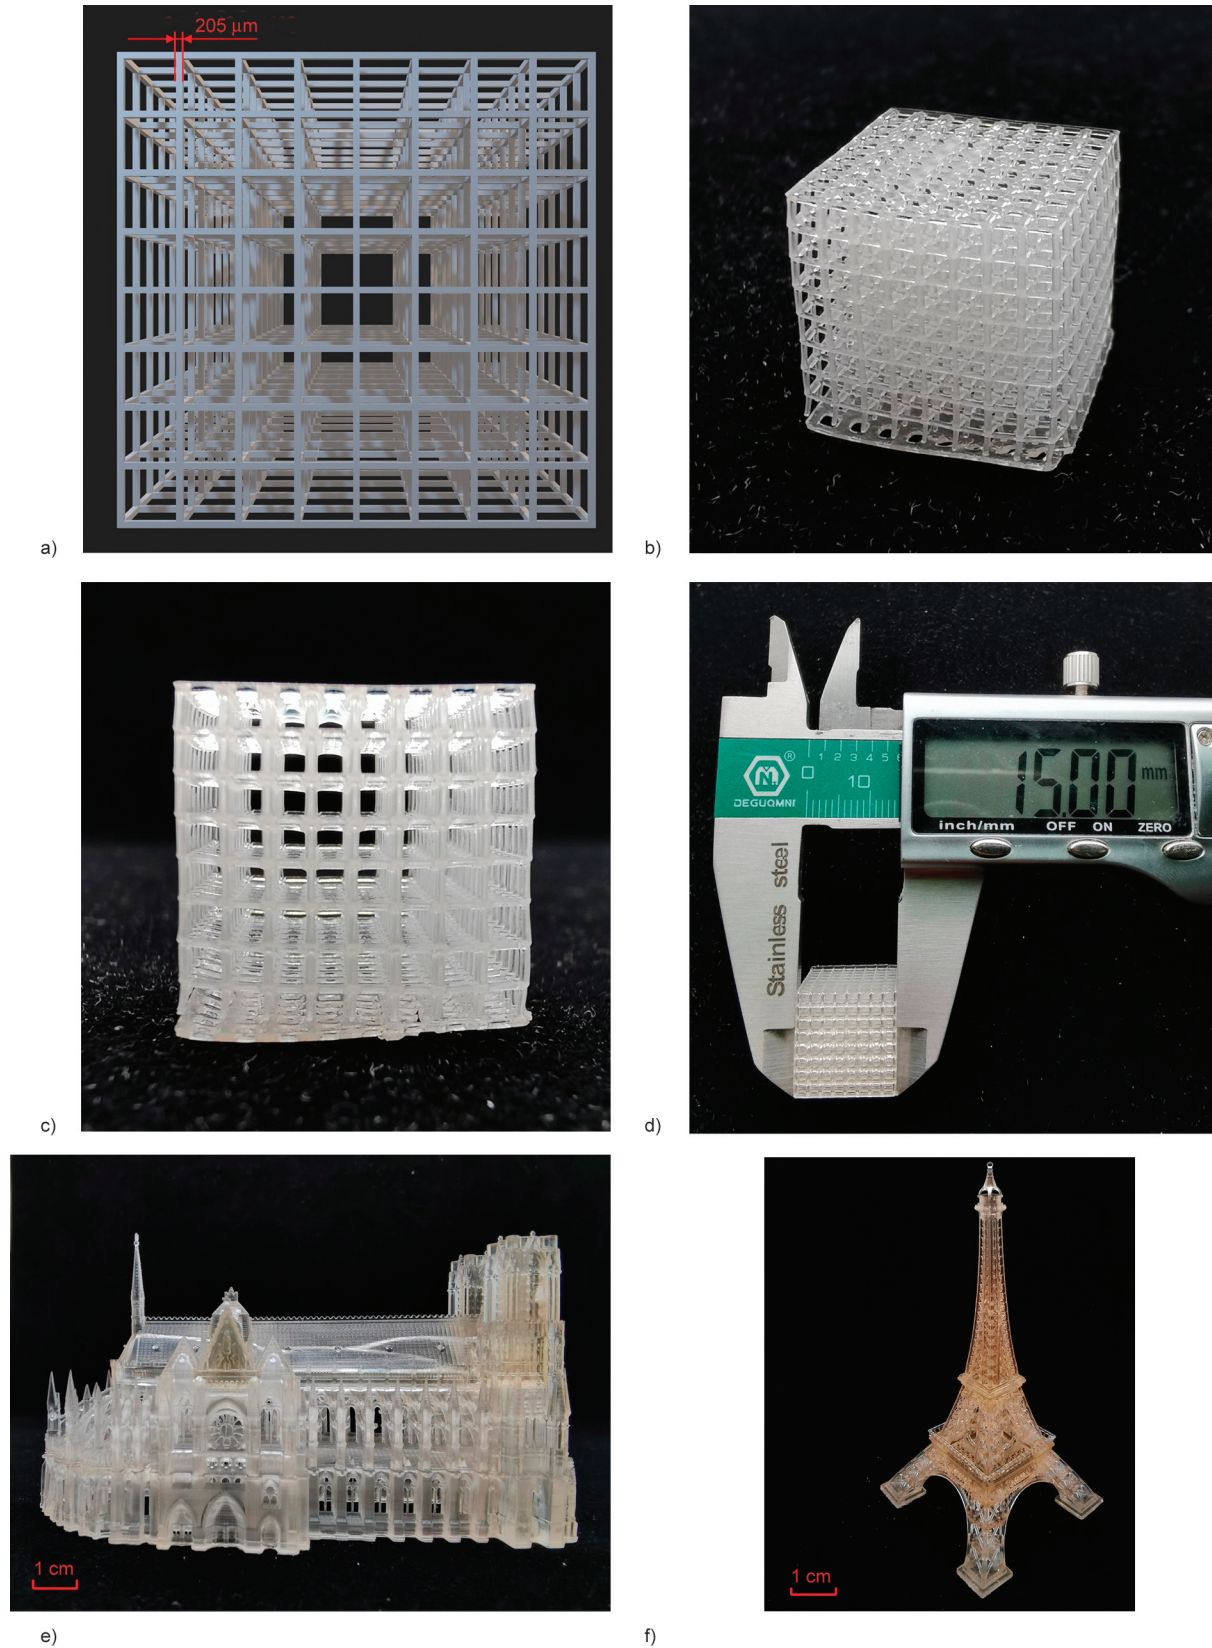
a) The 3D model of hollow cube design by CAD. b) Hollow cube printed using formulation S3; c) Front view of printed hollow cube. d) The size of a hollow cube. e), f) The printed model of Reims Cathedral and Eiffel tower was printed using formulation S3.
